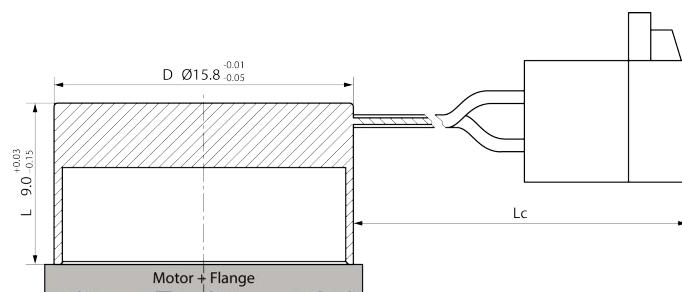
ENX 16 EASY Absolute XT – Dimensional Drawing [mm]
